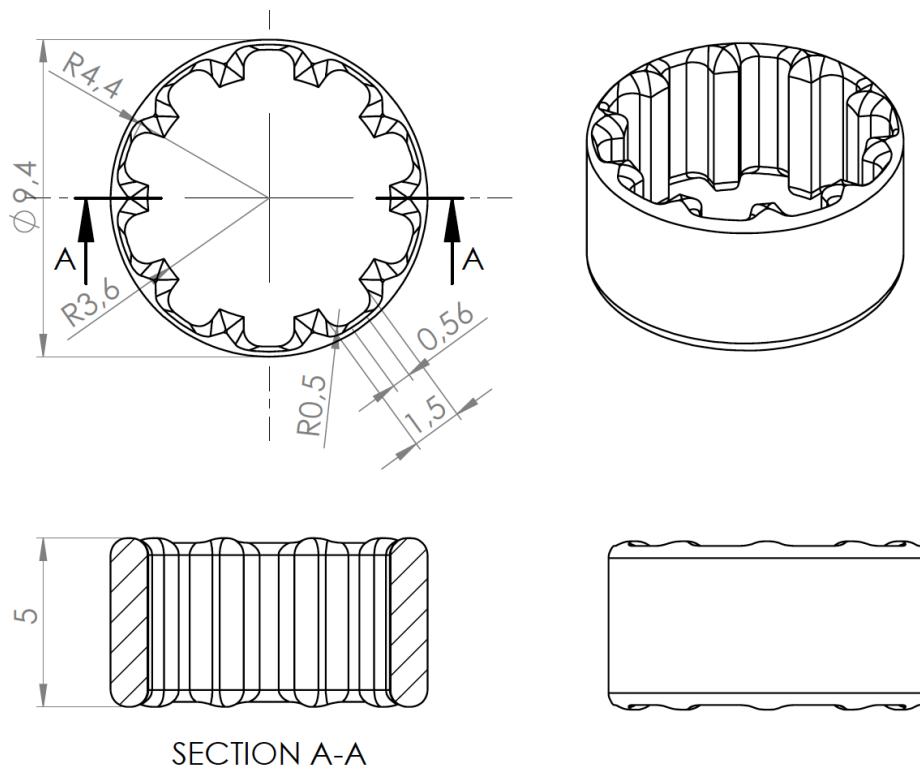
Selection of component views and dimensions (mm), C3 - Spacer
